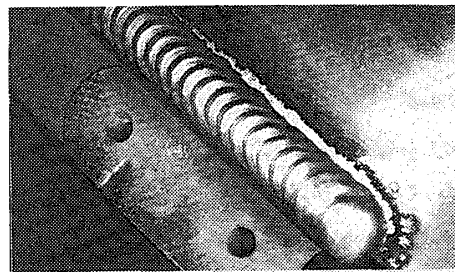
Example of AC/DC hybrid pulse MIG welding
